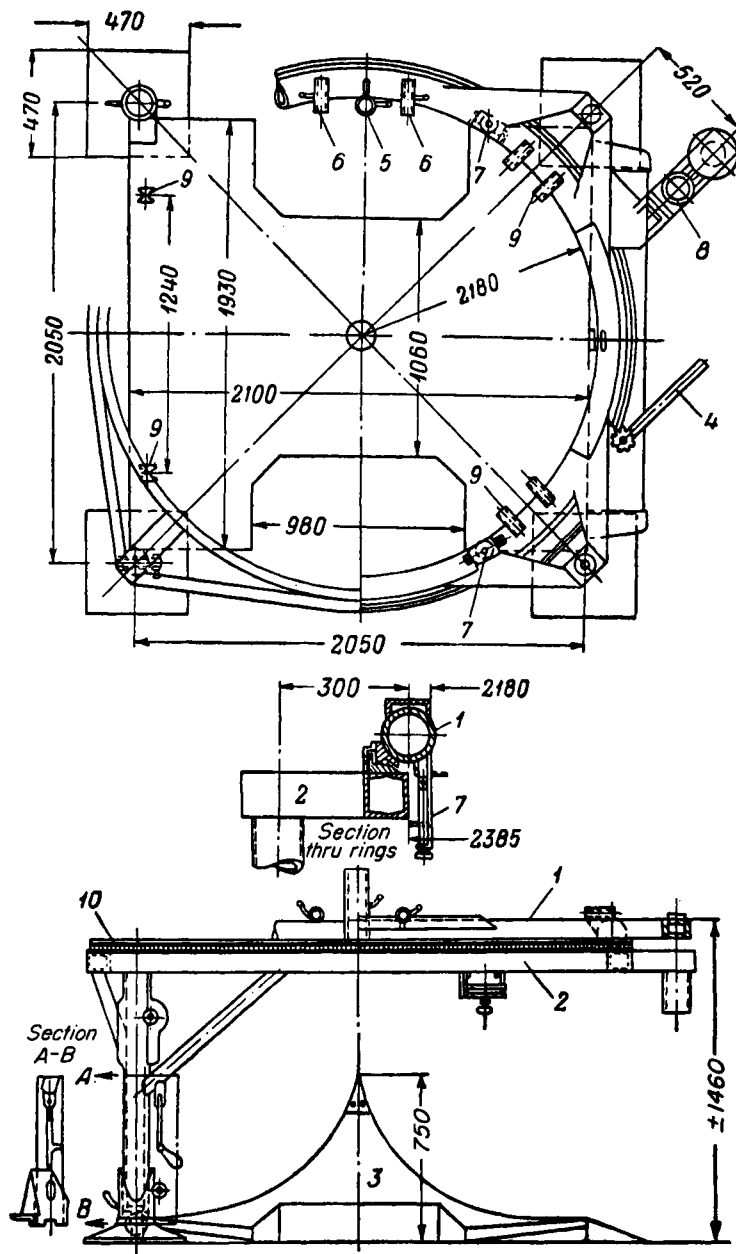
Launching platform (dimensions in millimeters): 1, upper ring; 2, lower ring with four legs; 3, flame deflector; 4, ratchet mechanism for rotation of the upper ring; 5, 6, fittings; 7, friction lock; 8, mast support; 9, fin rests, and 10, chain.
